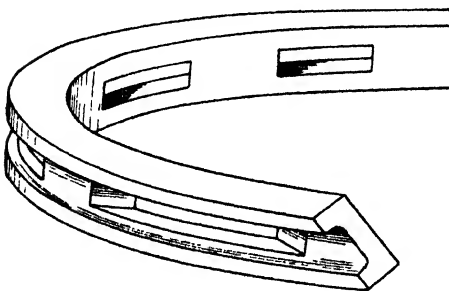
A Slotted Type of Piston Ring, with Angle Joint.
